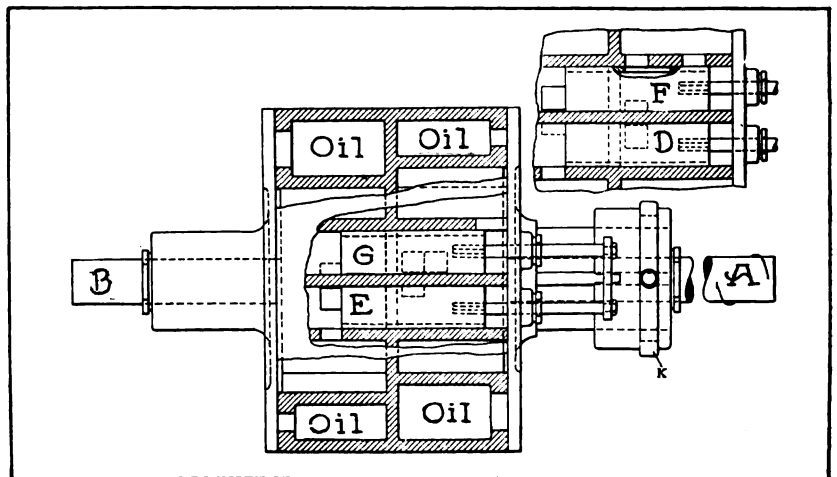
Longitudinal Section Through Valve Chambers and Oil Passages of the Kerfoot Hydraulic Transmission.
